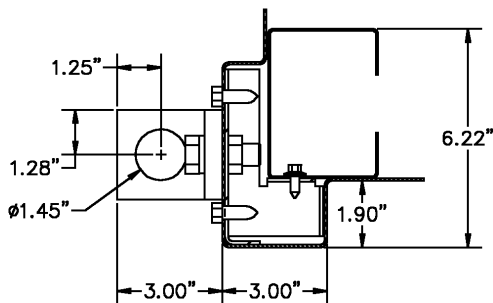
Curb Pocket Dimensions (Size 03-030 Typical)
